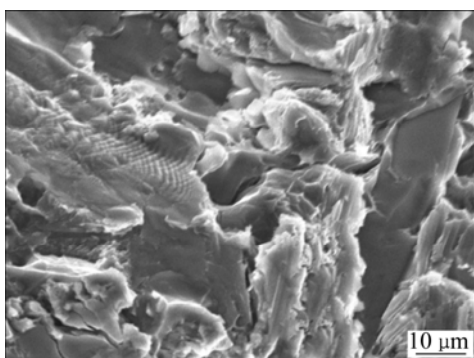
Microfractograph of welded joint with Ti-60Al alloy sheet filler
